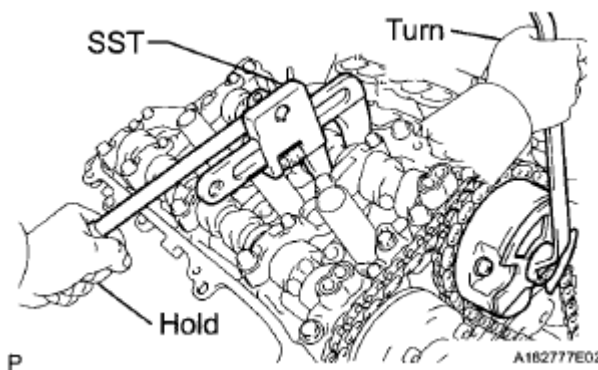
Loosening Flange Bolts Of Camshaft Timing Gear Assembly
